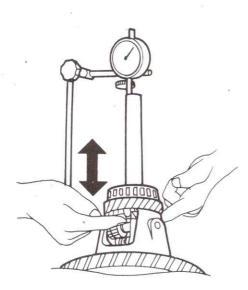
Checking side gear to pinion mate gear clearance (Sec 8)
